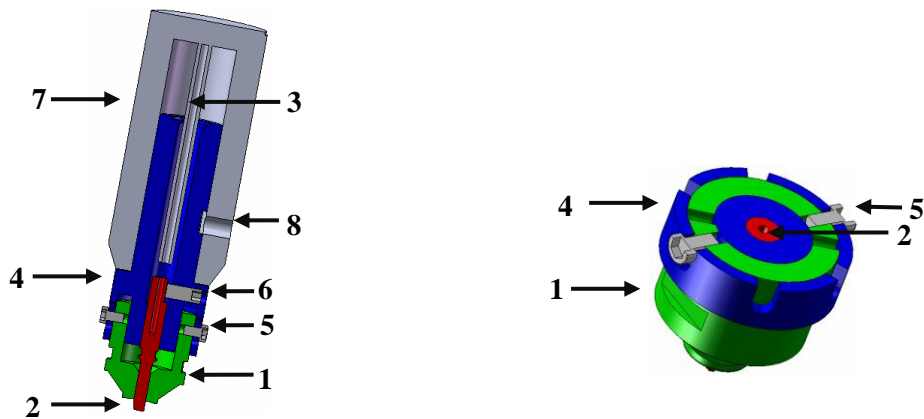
Patented modular tool, (a) section view of the entire piece, (b) section view of the pin and shoulder [70].
